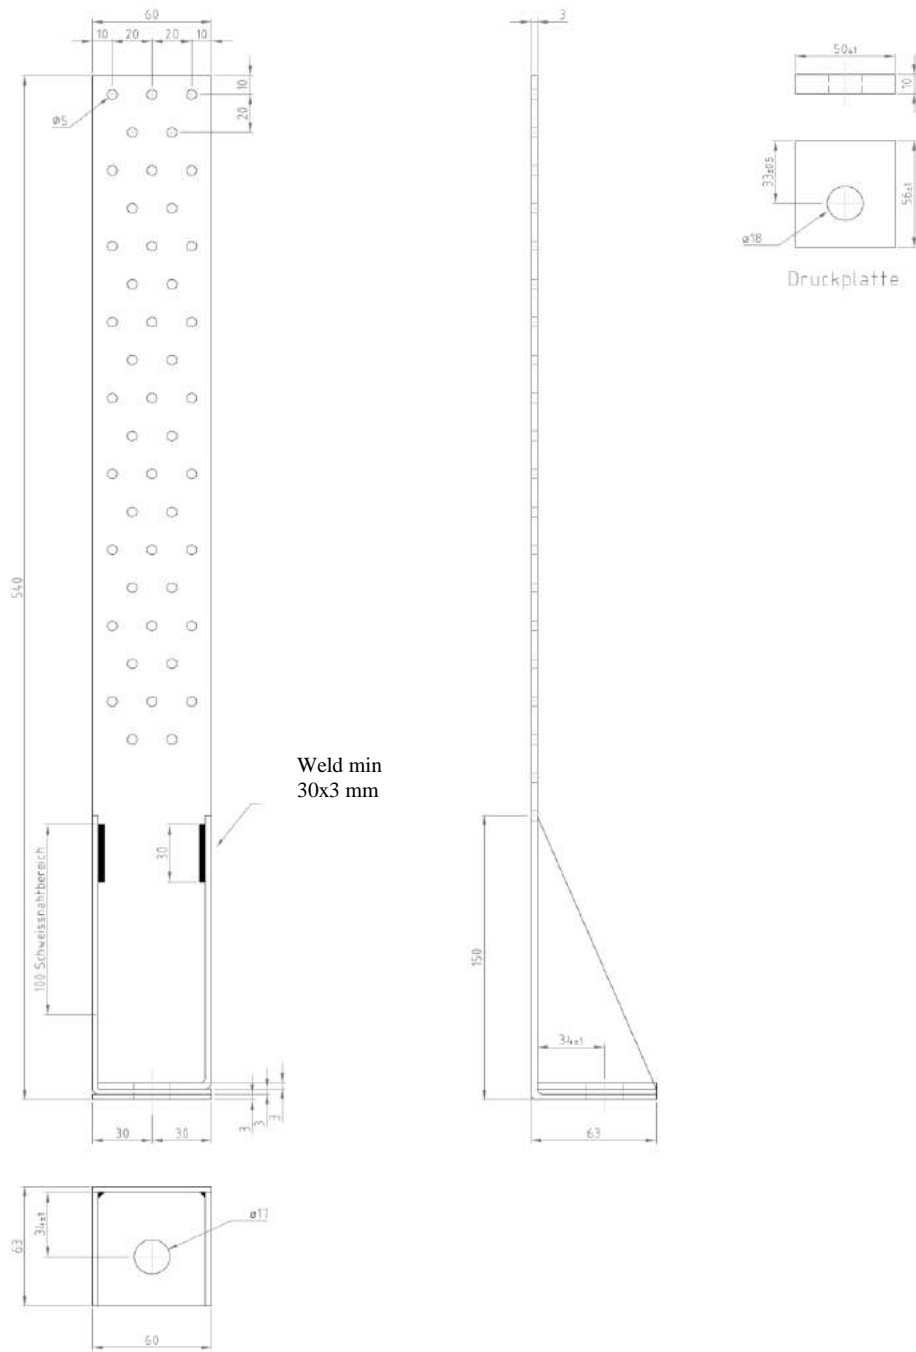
Dimensions of type WHT540 (drawing with washer 56x50x10)
